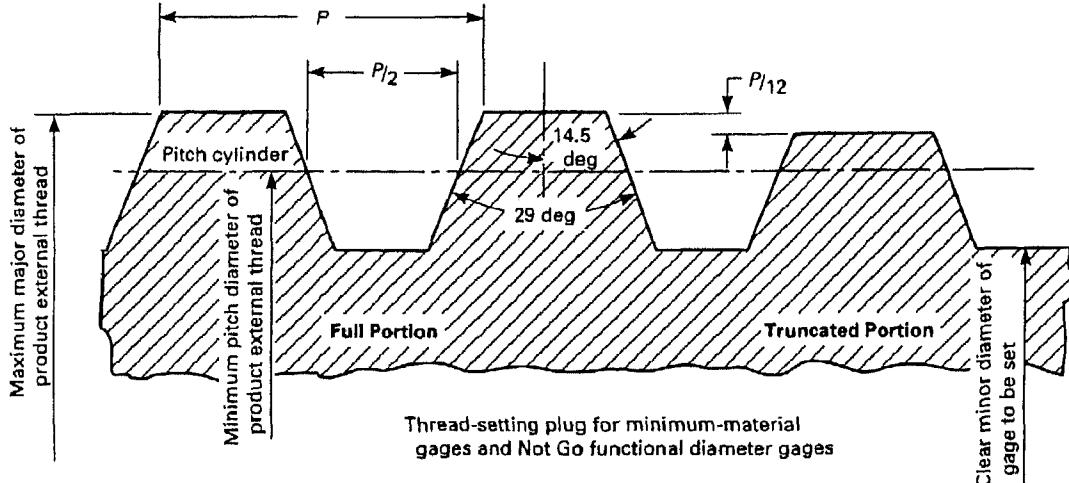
THREAD FORM OF FULL-FORM AND TRUNCATED THREAD SETTING PLUG GAGE FOR EXTERNAL THREAD NOT GO THREAD GAGE
